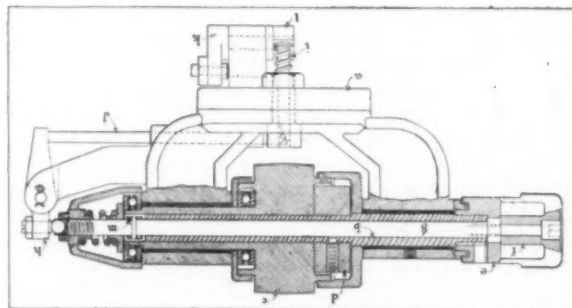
THE WORK BEING FINISHED IS MOUNTED ON AN EXPANDING CHUCK WHICH IS OPERATED BY A ROD EXTENDING ENTIRELY THROUGH THE SPINDLE OF THE WORK HOLDING HEAD.
